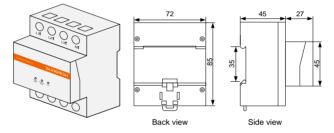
Three-phase Meter Dimensions (unit: mm)
